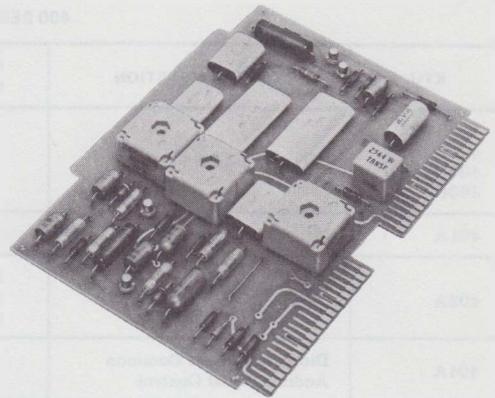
Typical 8-Inch 80-Contact 400-Series KTU
